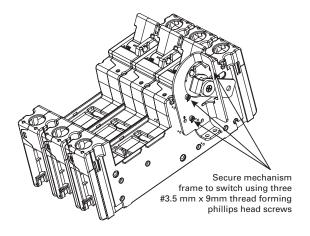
Secure mechanism frame to switch using three 3.5 mm x 9 mm thread forming phillips head screws in holes marked 1, 2 and 3.
